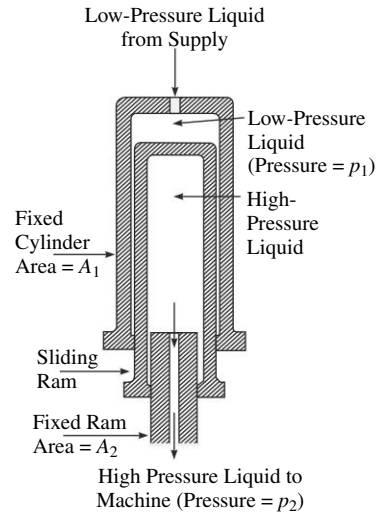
(a) Coaxial-type hydraulic intensifier
